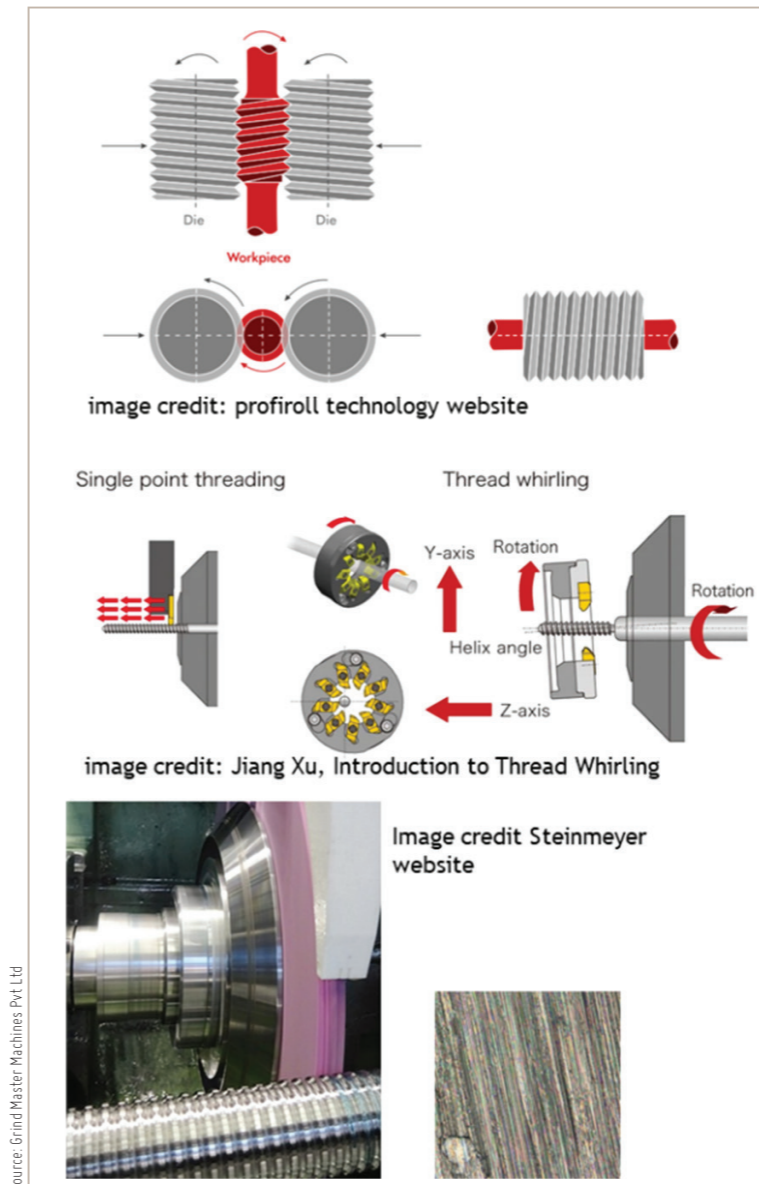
Schematics of the three processes — thread rolling, thread whirling, and thread grinding
